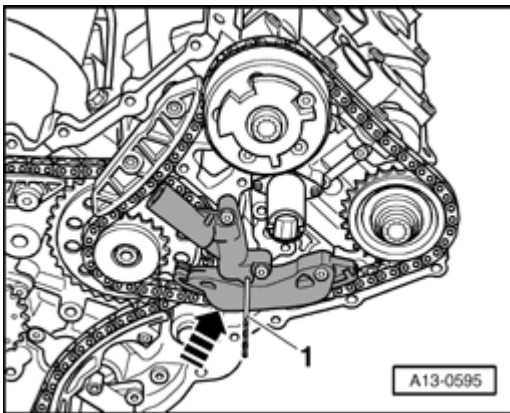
Pushing Glide Track Of Chain Tensioner For Right Timing Chain
